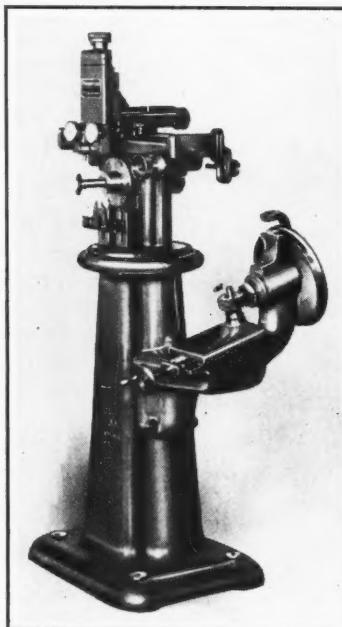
Gear Checking Machine with Helix-angle Inspecting Device
